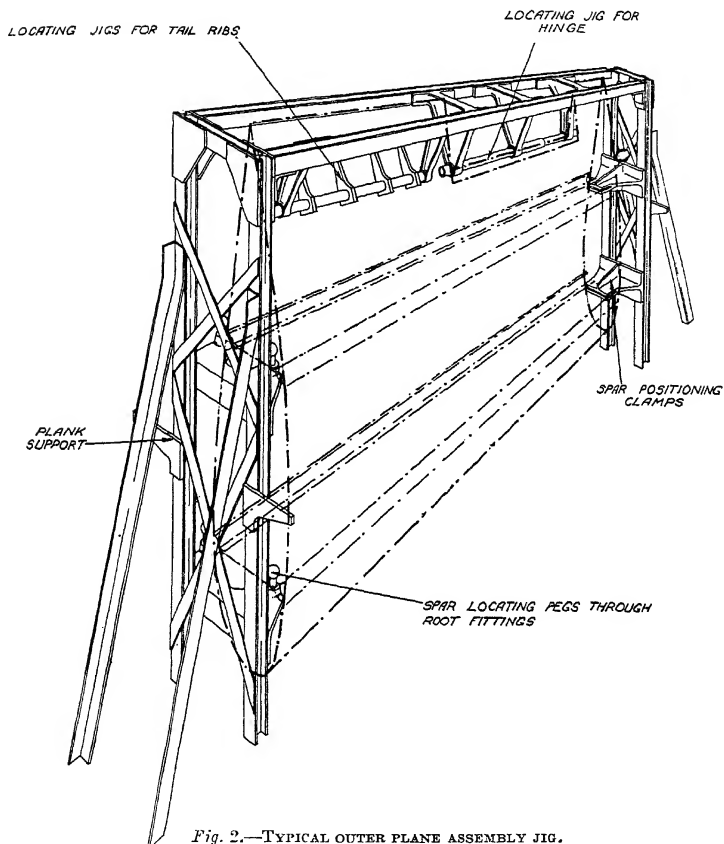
TYPICAL OUTER PLANE ASSEMBLY JIG.
